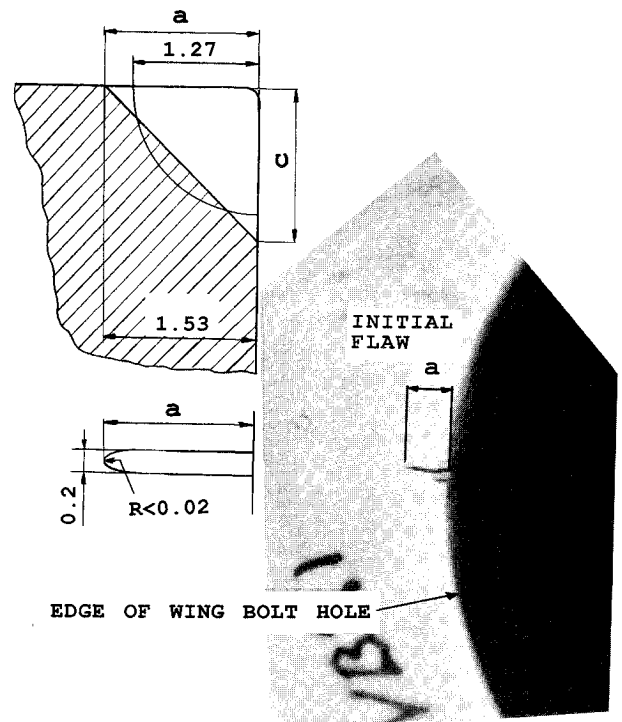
Sawcut with  $a = c = 1.53$  mm simulating a quarter-elliptical initial flaw with  $a = c = 1.27$  mm.
